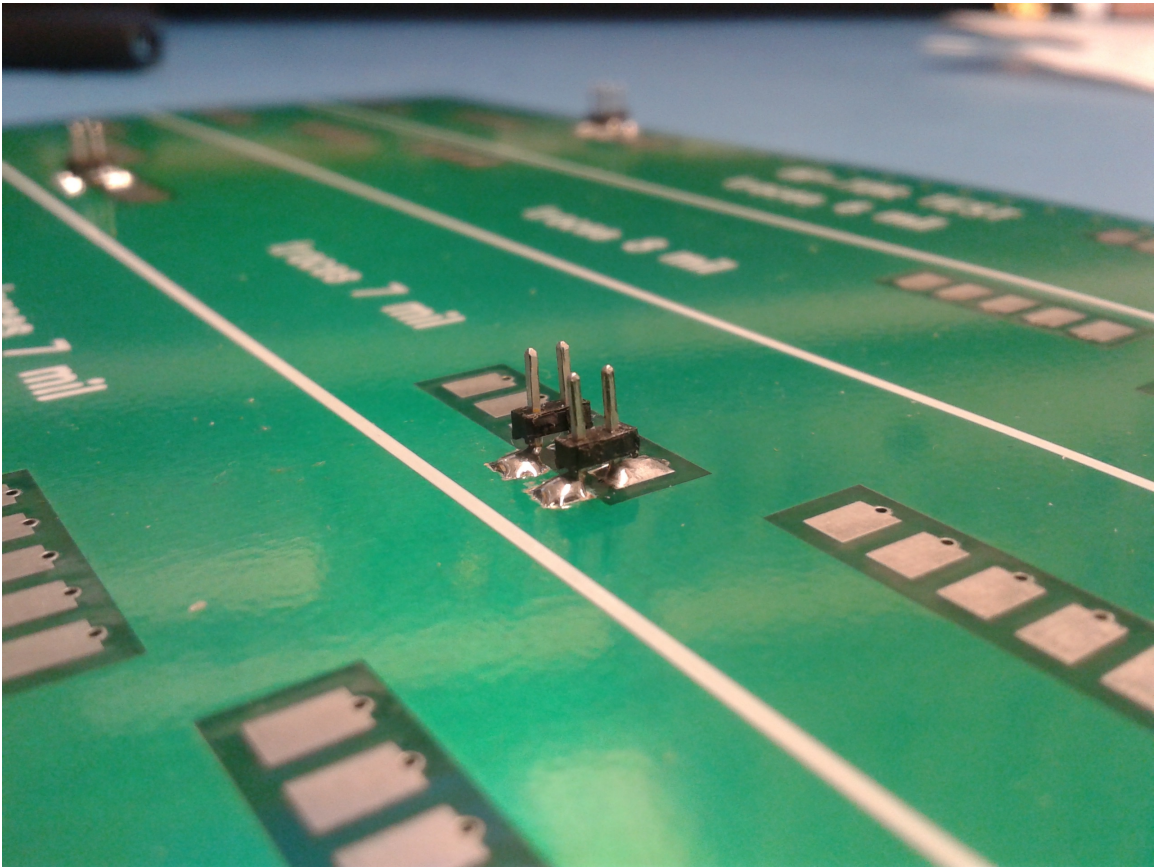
A picture of the two-pin connectors soldered to the test board.
